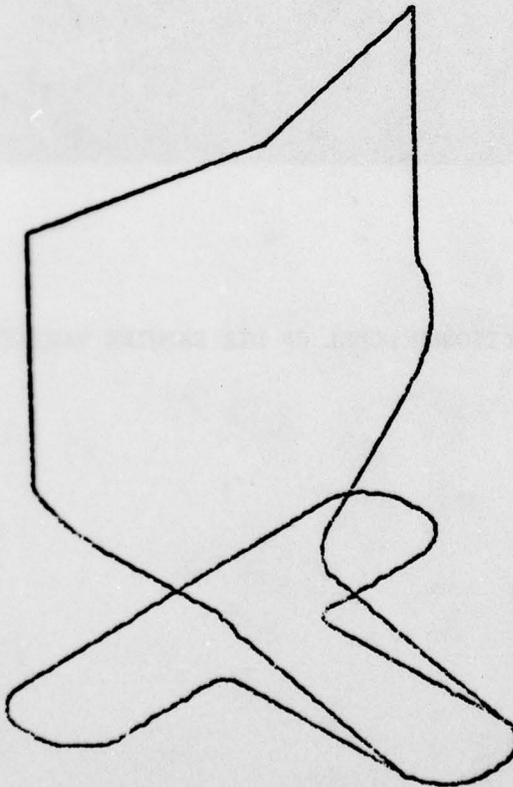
PLOT OF CUTTER PATH TO CUT EDM ELECTRODE FOR FRONT OPENING OF THE FLAT-FACE "T" DIE
